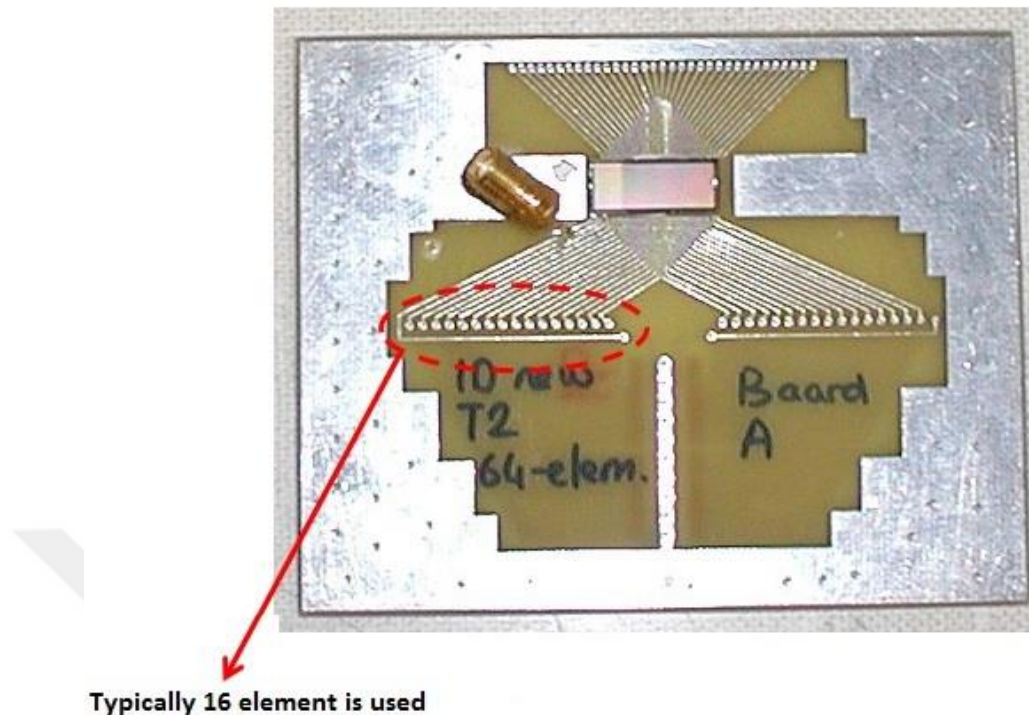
A typical fanout PCB used for the array shown in Figure 24.
